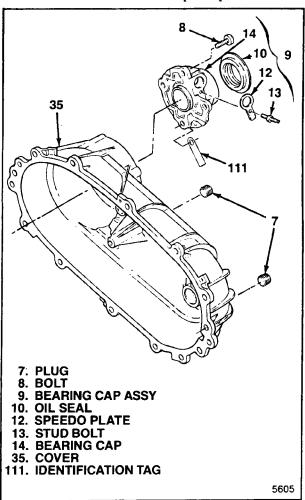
Bearing Cap Group (Rear Yoke or Flange)
